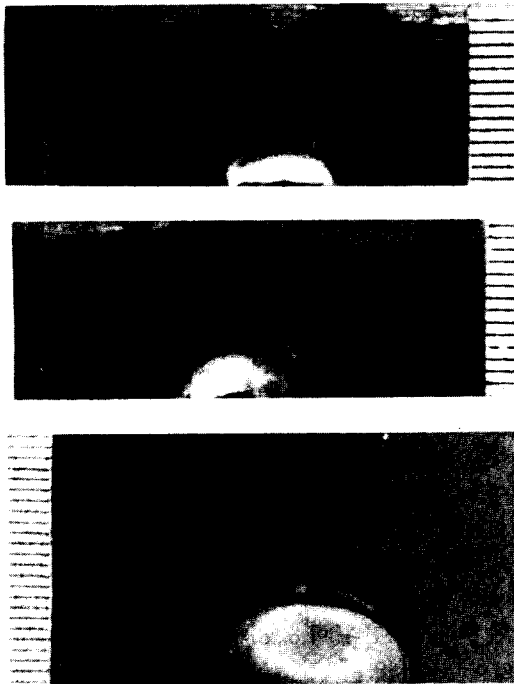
Heated zone shapes on the weldment with stationary arc
